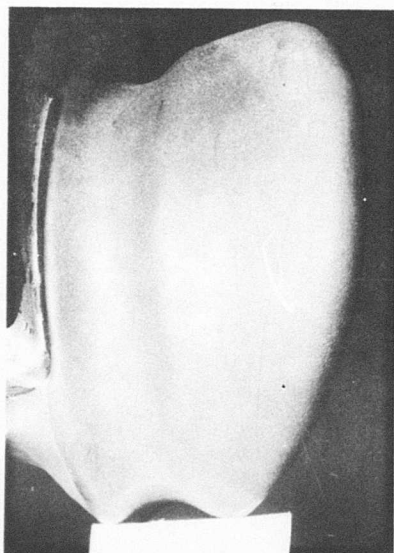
SPALLED AREA IN CABLE GROOVE OF HOOK POINT NO. 1
